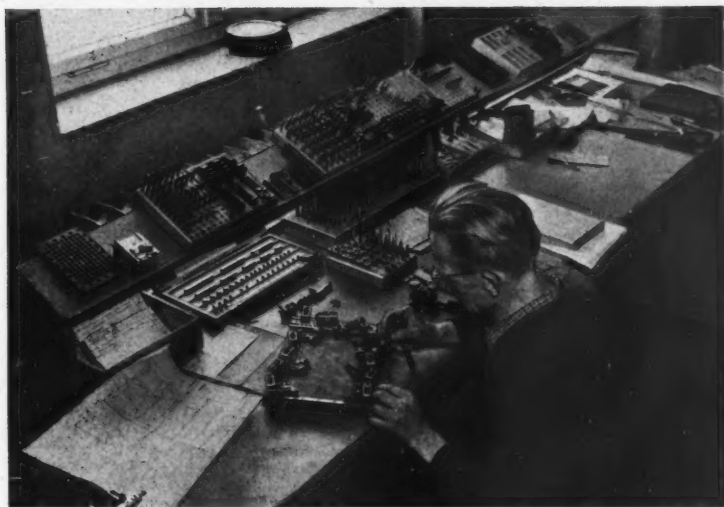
In each department, area or factory where the method is to be used, space is set aside for the storage of the fixture building parts, and benches are provided for assembly
